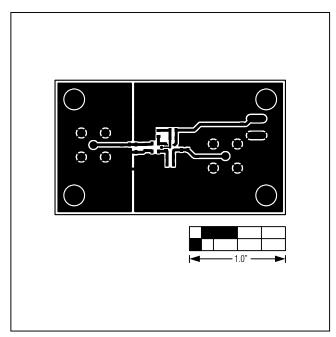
MAX9622 EV Kit PCB Layout—Component Side
